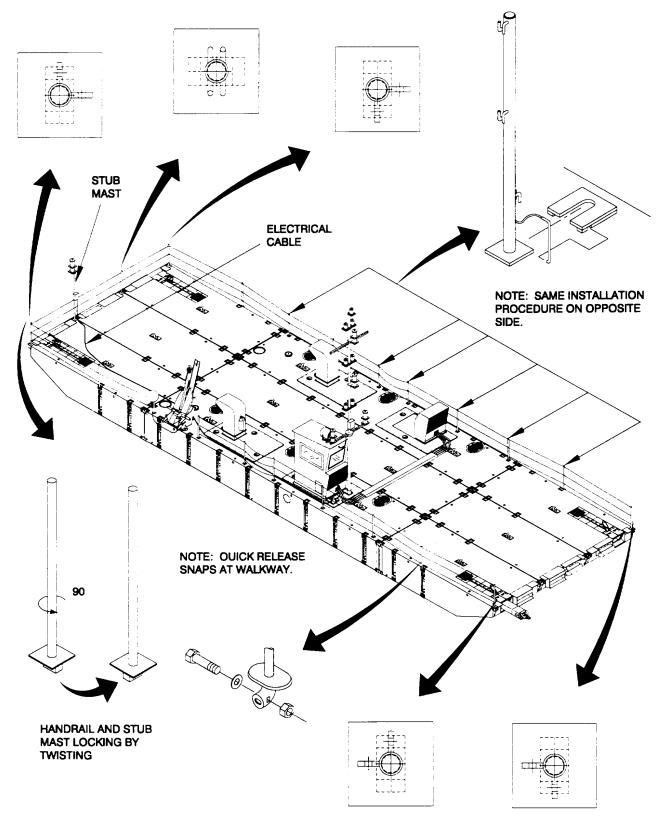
Propulsion Module/Powered Section Assembly (Handrail - View E). (Sheet 7 of 11).
